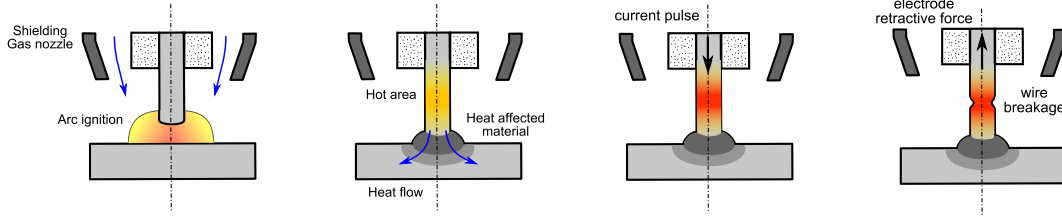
Schematic of CMT welding for the pin manufacturing process.
